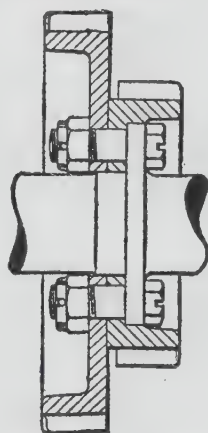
FLANGE BOLTED GEARS ON SECONDARY SHAFT.
